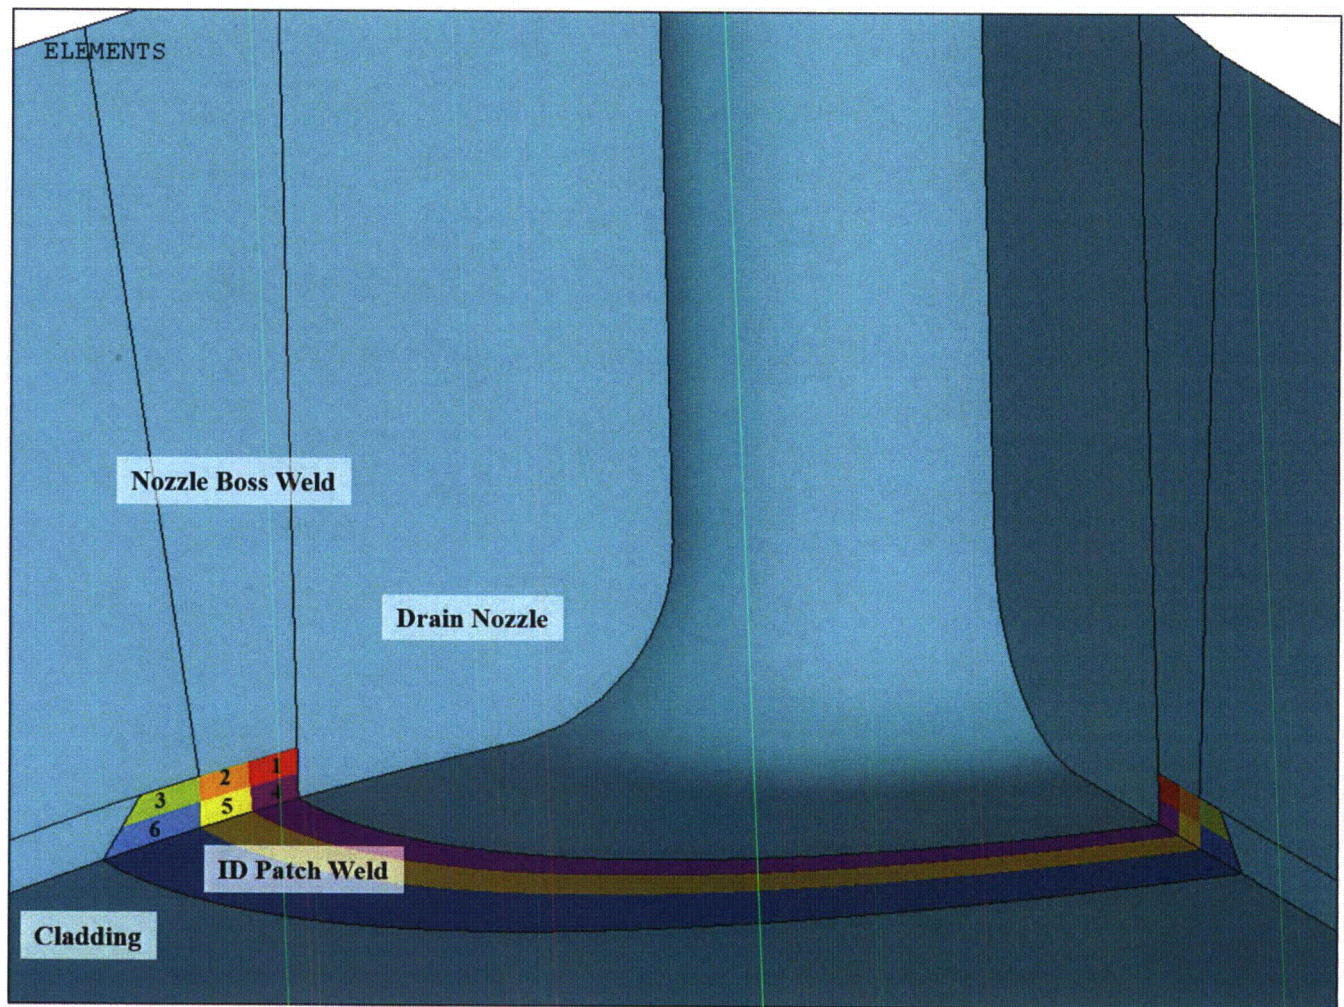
Weld Nugget Definitions for the ID Patch Weld
